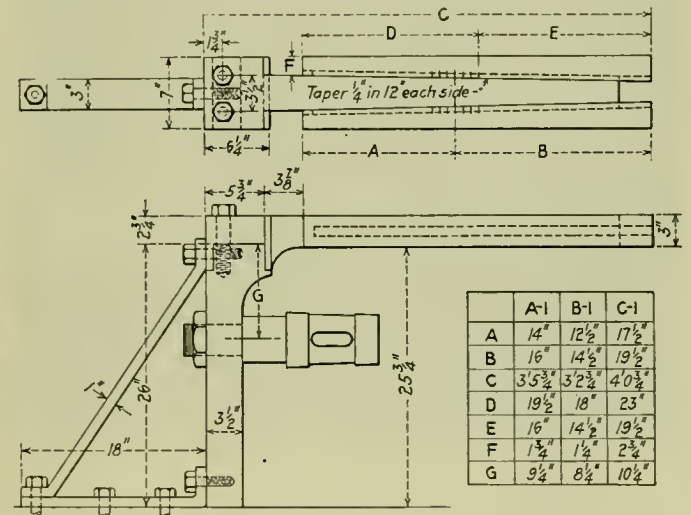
Details of Fixture Used In Babbitting Alligator Crosshead Gibs
